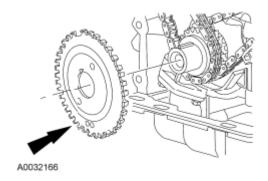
Locating Crankshaft Sensor Ring Courtesy of FORD MOTOR CO.
